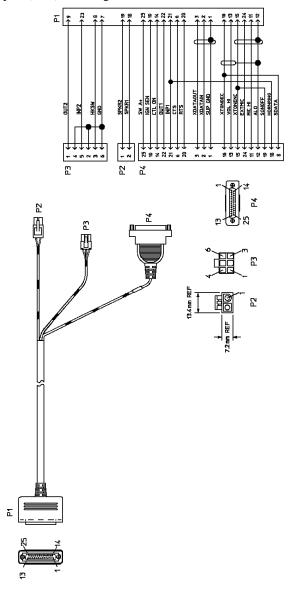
Remote Mount Extended Option Accessory Cable 19B802554P7
